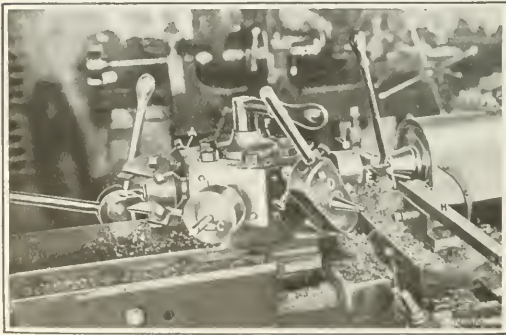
Set-up on Warner & Swasey Brass-working Lathe for performing Second Series of Operations on Fuse Body
